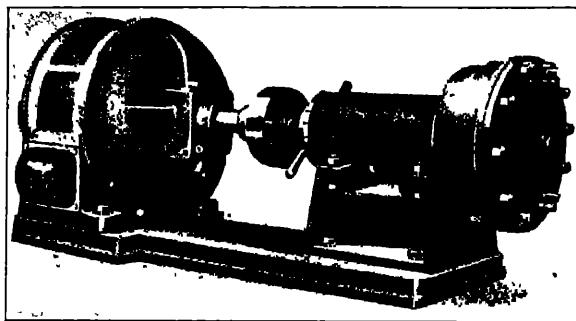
Perspective of Grooved-Surface Colloid Mill
